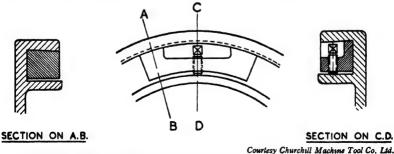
BALANCE WEIGHT USED IN SPECIAL BALANCED COLLET
